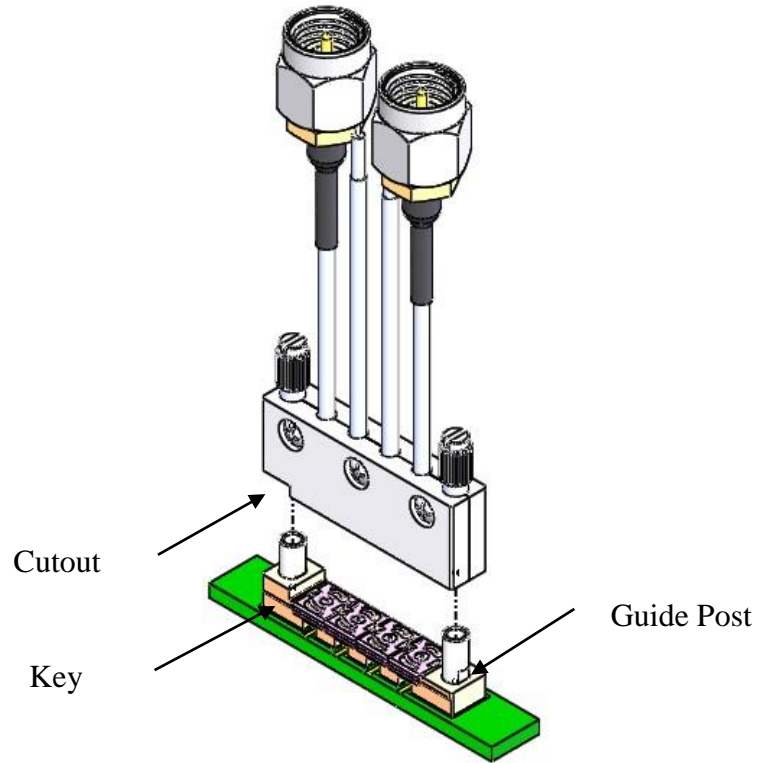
Connector/ Cable assembly, 4 position, Alignment
